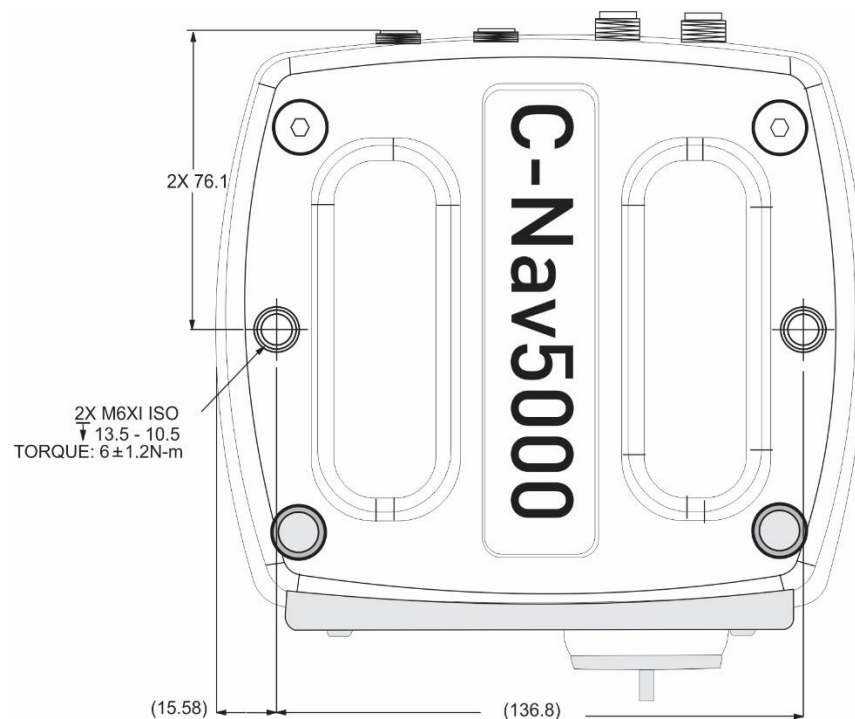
C-Nav5000 Base Plate Dimensions without Mounting Brackets
